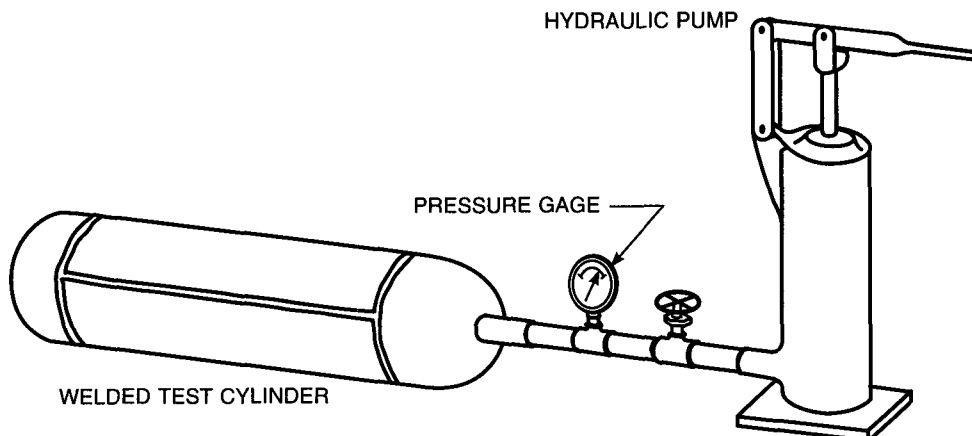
Hydraulic Pump Used for Testing Welded Tubing or Small Cylinders
